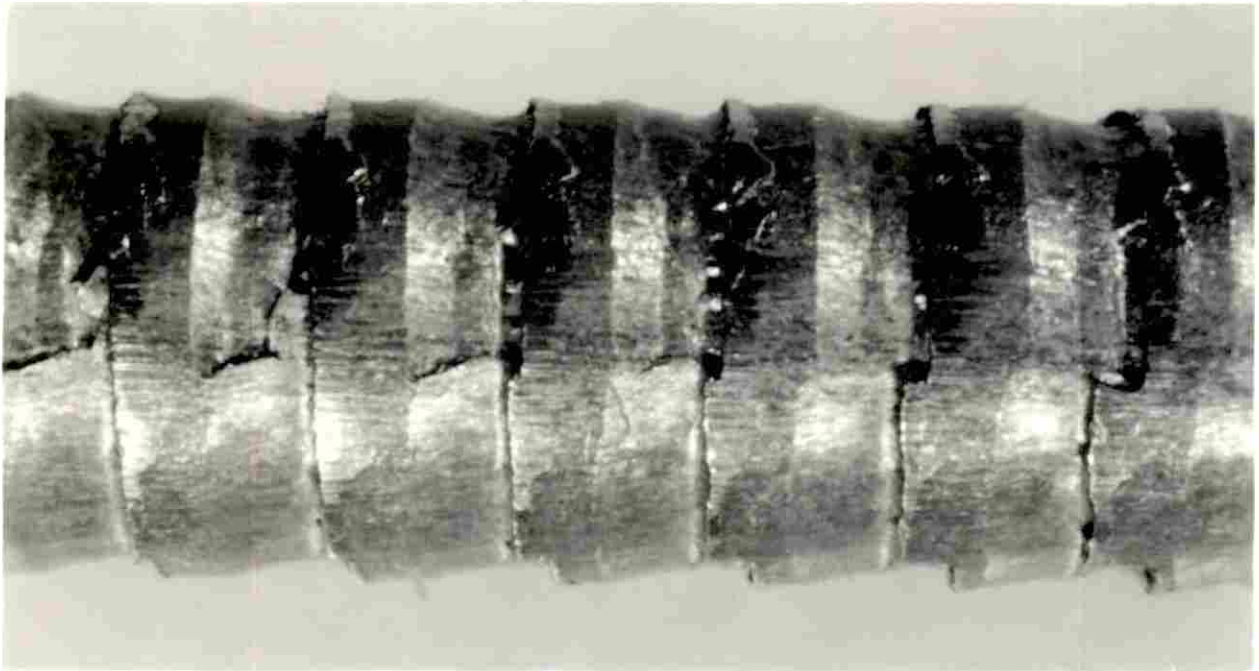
Nail No. 2119 before driving through 26 gauge aluminum (x20d).
